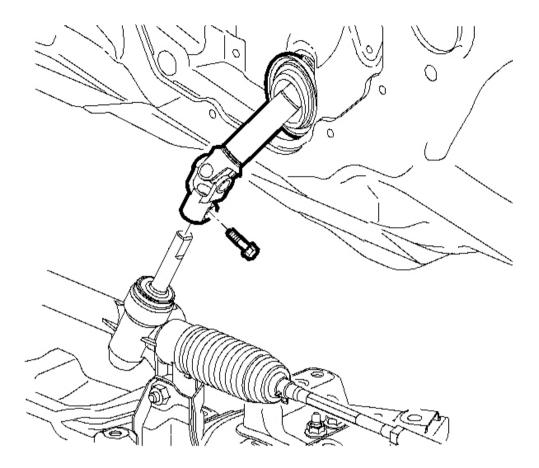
Intermediate Steering Shaft & Steering Gear Pinch Bolt Courtesy of GENERAL MOTORS CORP.
